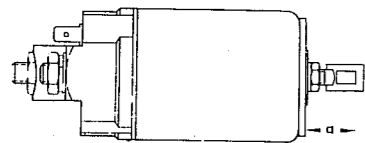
Check dimension "a" before fitting the solenoid.
